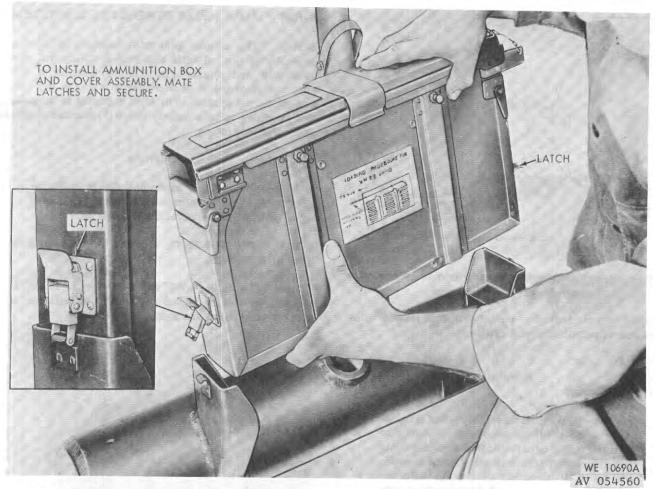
Installation or removal of ammunition box and cover assembly on tube assembly
